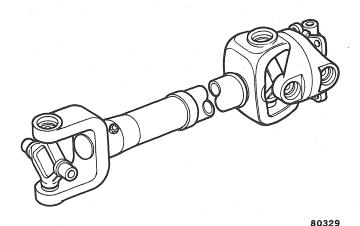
E-1 Front Propeller Shatt Assembly— Cherokee, Wagoneer and Truck Models Specifications 2E-10 Tools 2E-11 Universal Joint Angle Measurement and Adjustment 2E-8 Universal Joint Service 2E-9
